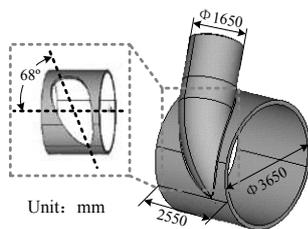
Structure and groove of welded cylinder with angle-inserting elbow
